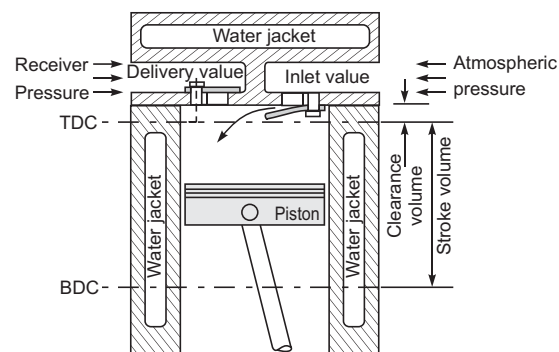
Sectional view of single-stage reciprocating air compressor
